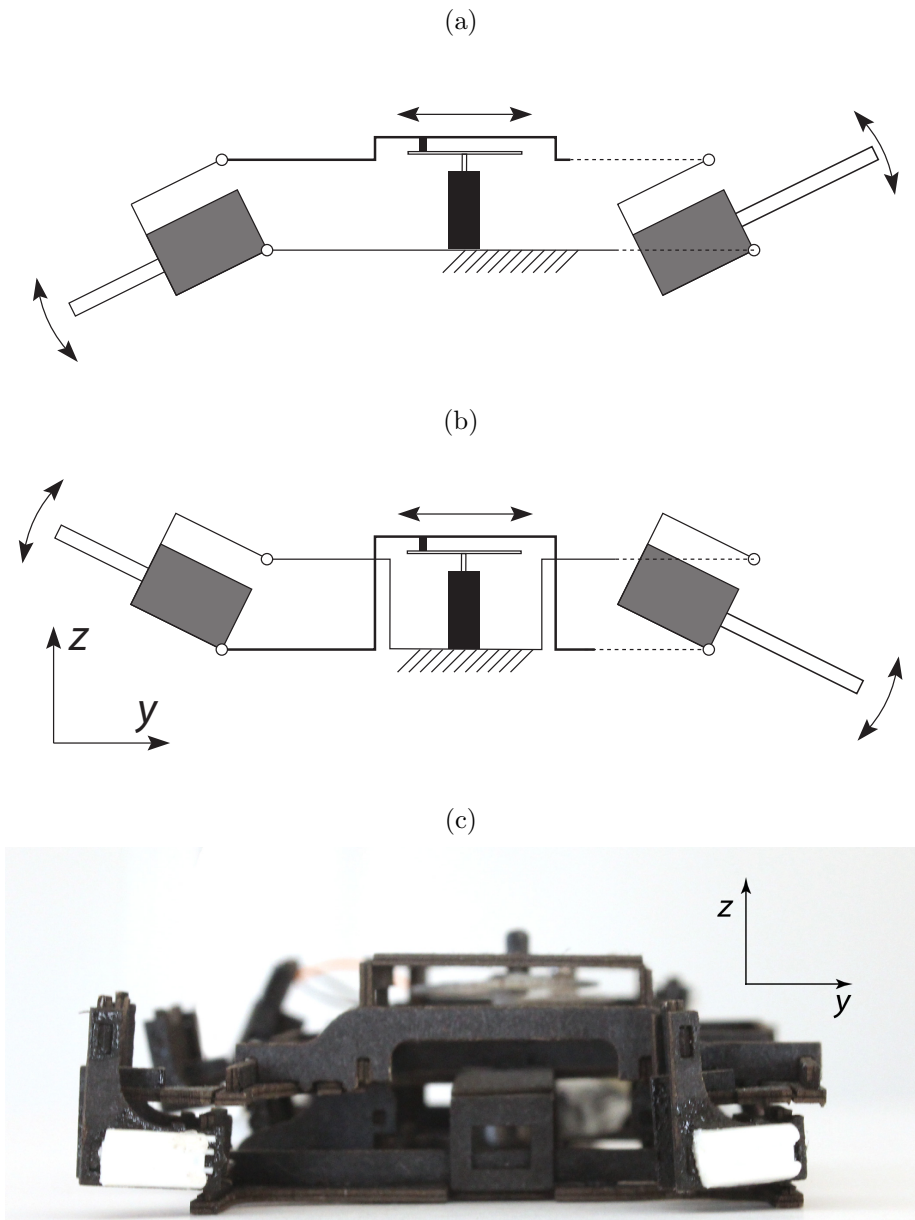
Kinematic drawings show how the legs are raised and lowered by moving the top drive linkage (bold) along the y-axis. The motor is mounted to the grounded linkage while the output of the final gear stage drives the top linkage. (a) shows how front and rear legs are driven, and (b) shows how the mid-legs are driven. The grey rectangle is the side view of the four-bar mechanism in Figure 3.3. Linkages are dashed to not obscure other linkages. They do not collide when realized in three dimensions. (c) is a view of CLASH from the same perspective as (b).
